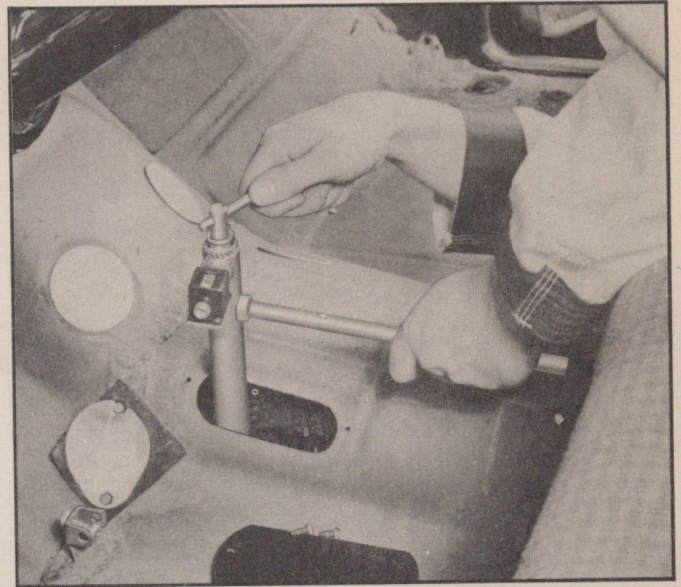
Adjusting Front Band Using J-2681 and Tachometer
